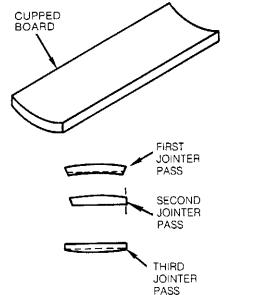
Cupped boards, if they are narrow enough and the cup is not extreme, can be jointed in this manner.
